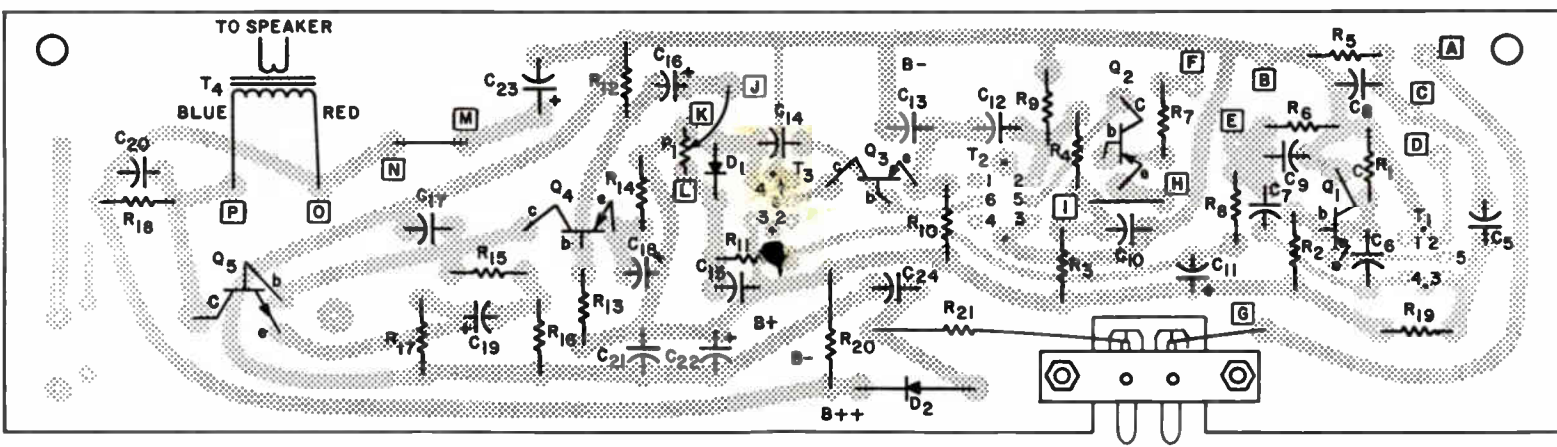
"See-through" drawing showing location of parts from the foil side of the circuit board.
